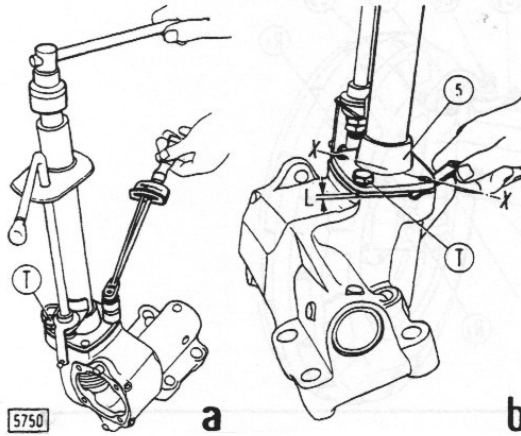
Adjusting steering shaft tapered roller bearings. (a) Tightening cap screws (T) with torque wrench. (b) Measuring clearance (L) between cover (5) and steering box with feeler gauge. (X-X) Clearance measuring axis. (5) Top cover with steering column.
